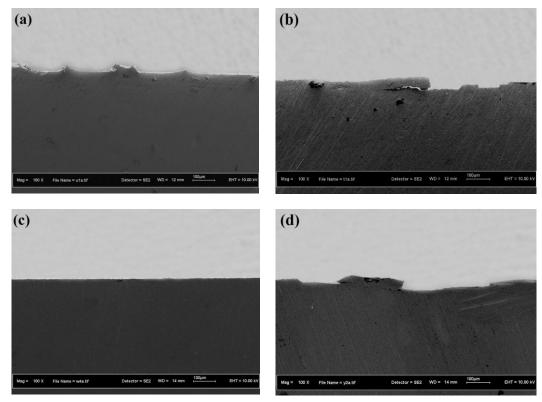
SEM micrographs showing the burrs forming on entry and exit edges of the milled Ti-6Al-4V work-pieces at cutting speed 300 m/min and feed rate 0.06 mm/tooth using (a) new tool and entry edge (b) worn tool and entry edge (c) new tool and exit edge (d) worn tool and exit edge
